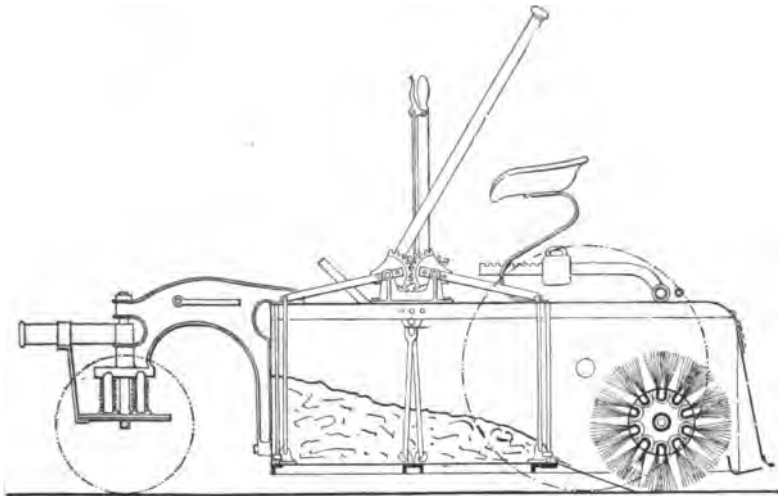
SWEEPING AND COLLECTING MACHINE.
